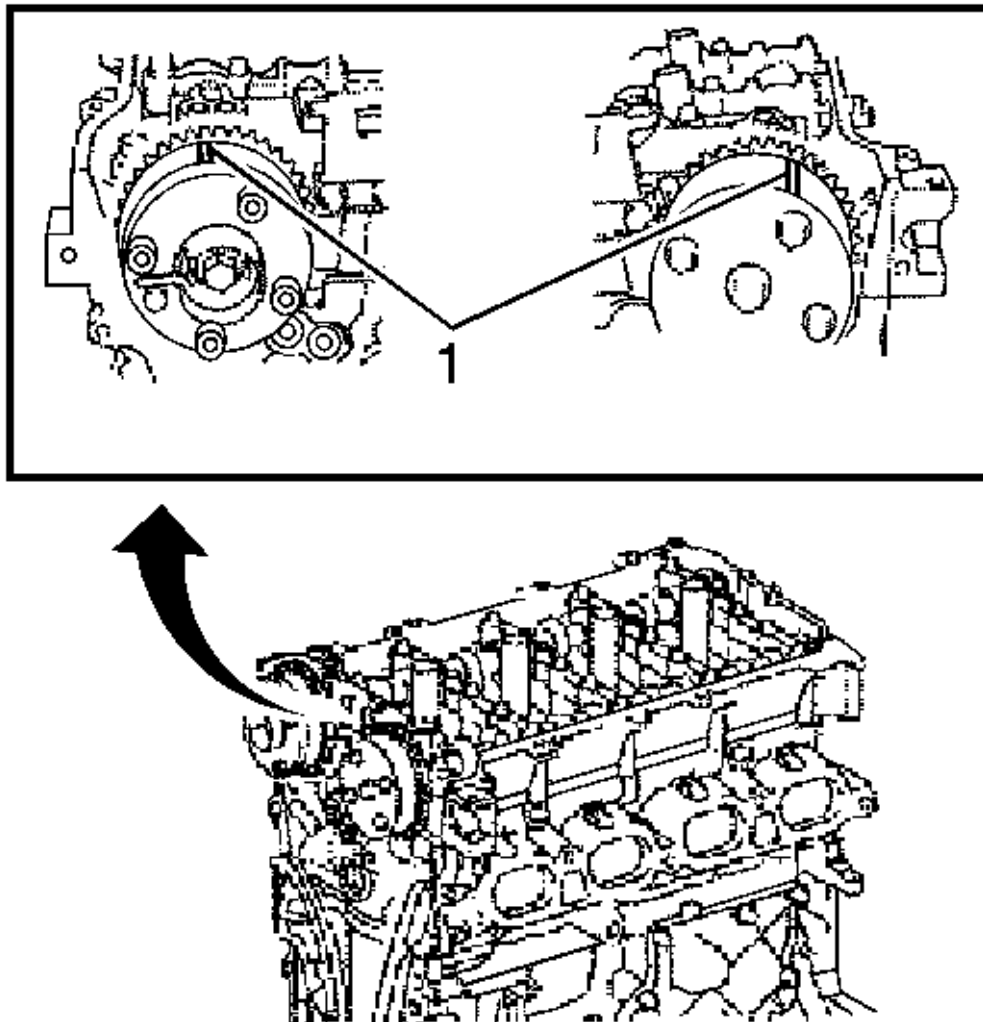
Checking Timing Marks On Each Camshaft Timing Gear
